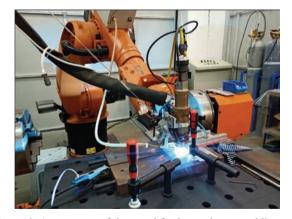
Appearance of the stand for laser-plasma welding with application of KUKA KR30NA robot during operation
